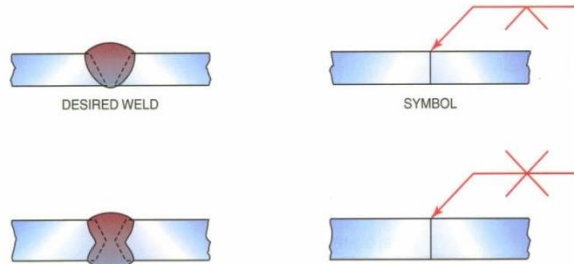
Designating single- and double-groove welds with complete penetration. Society.
